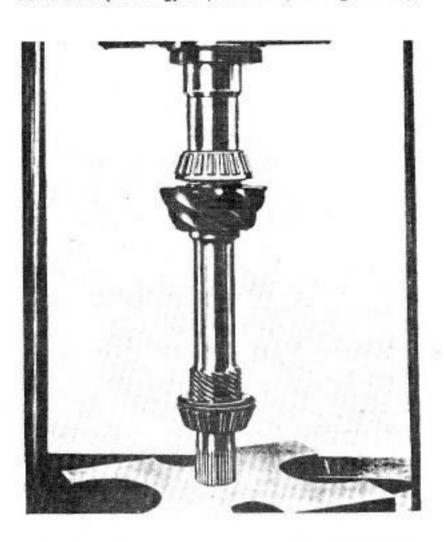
Pressing cooled bearing inner races onto the pinion.
